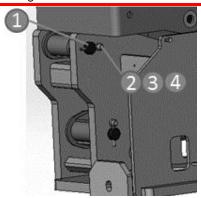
Lower arm fittings and lower two arm fittings are installed
